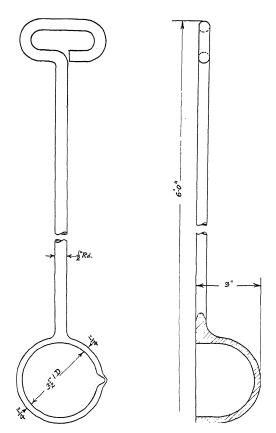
Working drawings of spoon used for taking preliminary tests.
